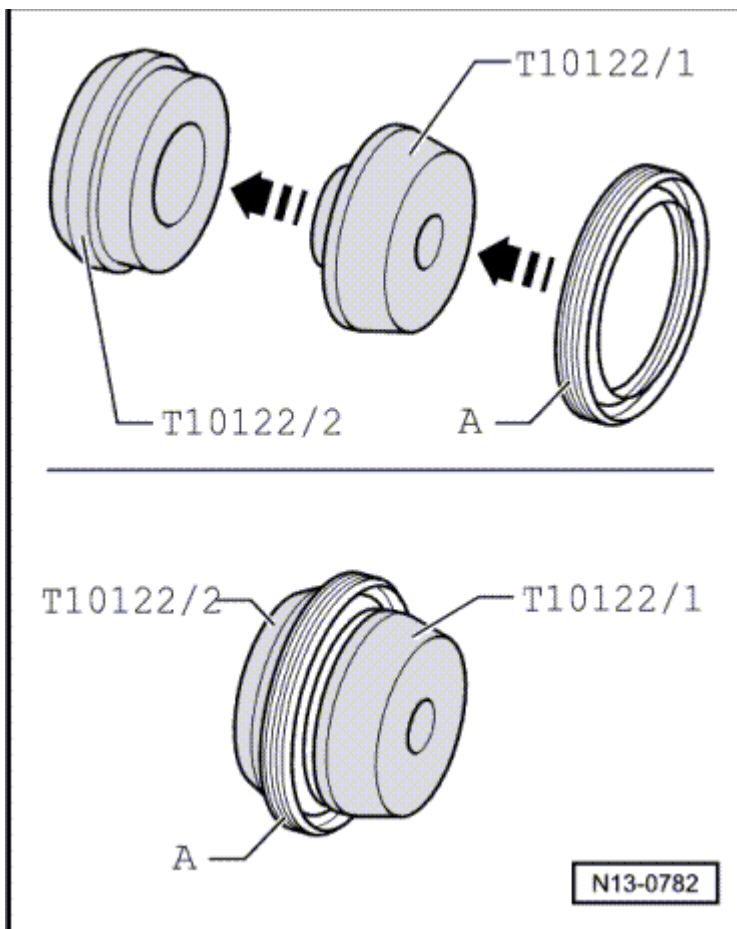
Identifying Seal, Sleeve T10122/1 And Assembly Tool T10122/2
